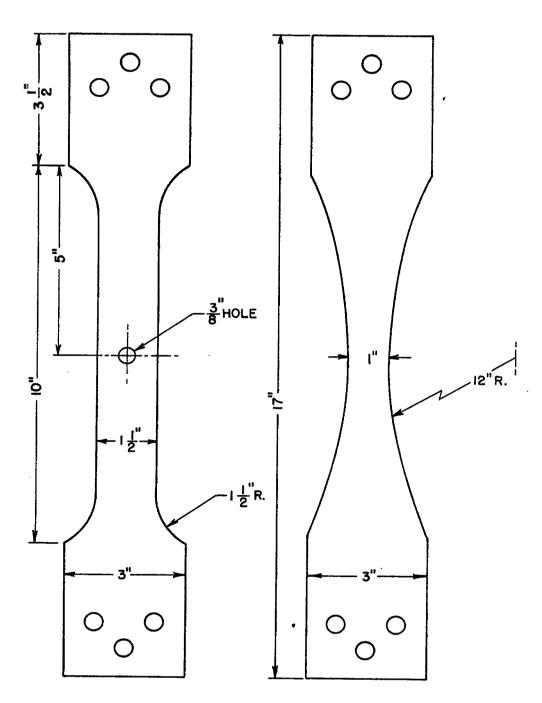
FATIGUE TEST SPECIMENS USED AT BATTELLE FOR AUXILIARY TESTS.
